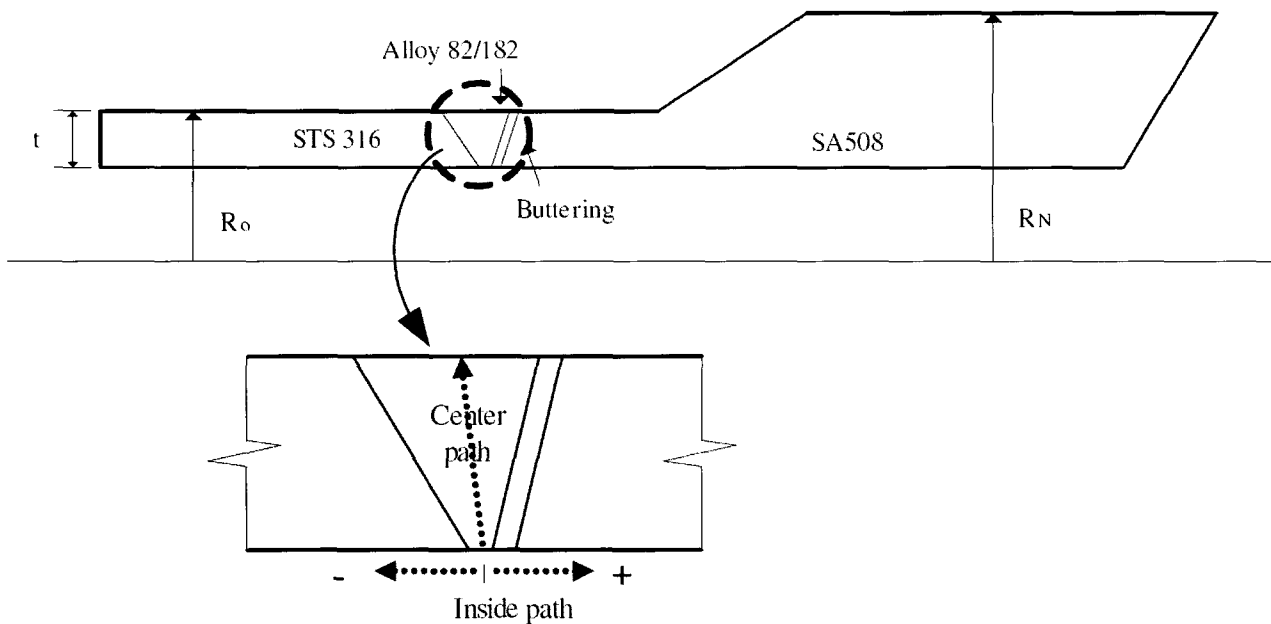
A Welding Zone of Dissimilar Metals and Prediction Paths in the Welding Zone for Data Acquisition
